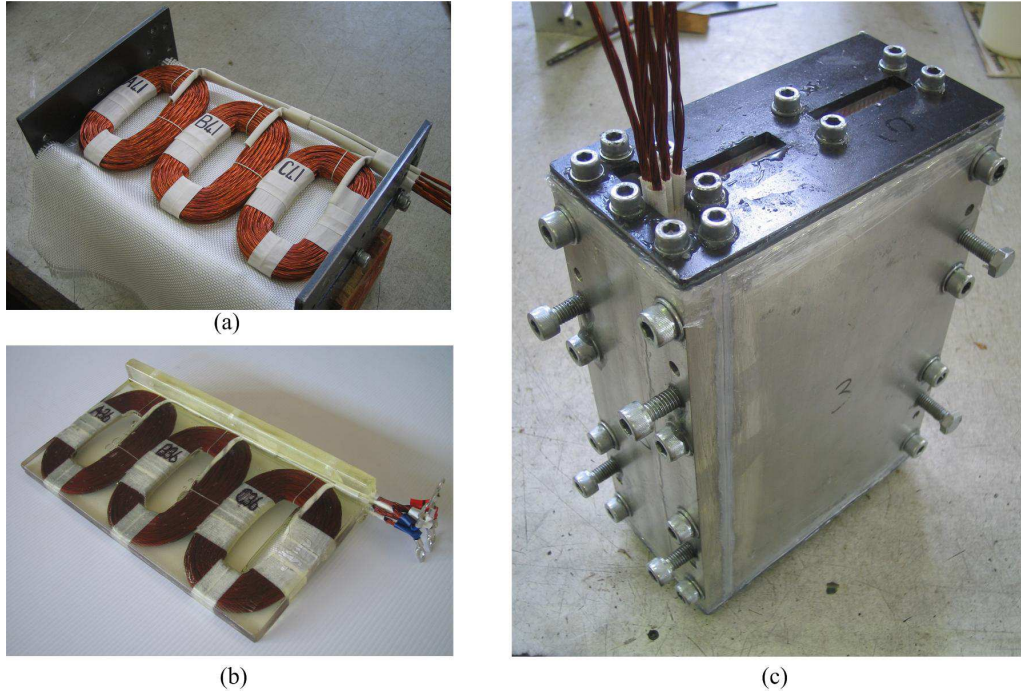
(a) Three stator coils laid-up in the mould, (b) a finished stator section and (c) the fully assembled mould, ready for casting epoxy into the opening at the top.
